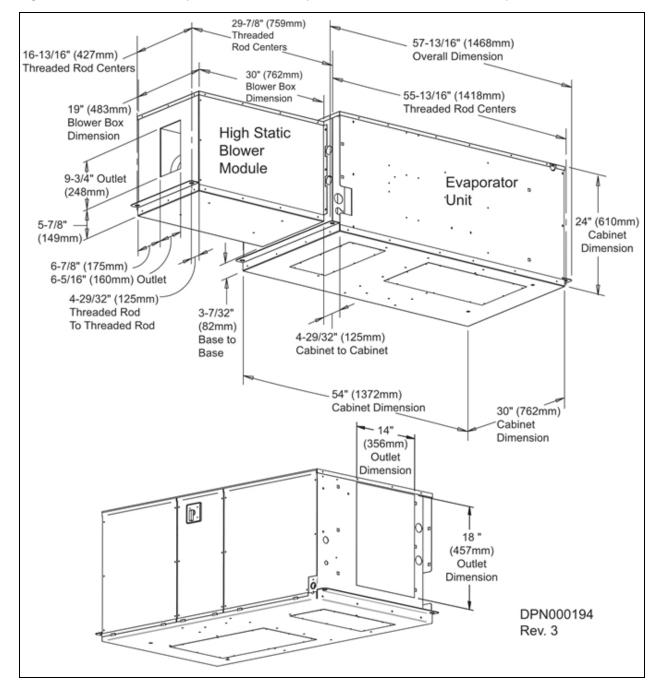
Dimensions, evaporator units with optional belt drive blower assembly
